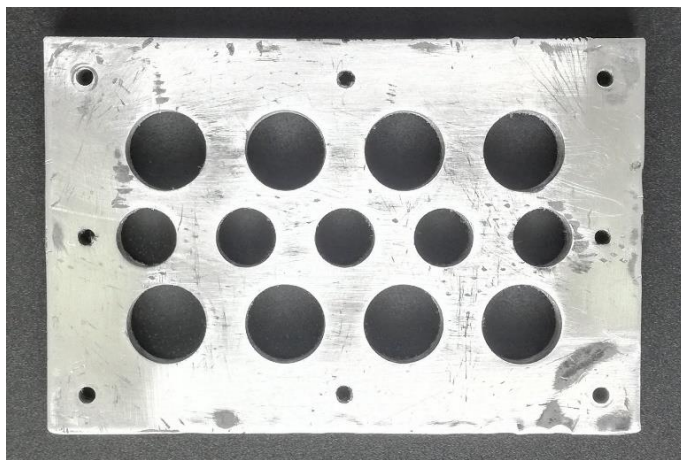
Parts of the Aluminium Mould: Middle mould layer.
